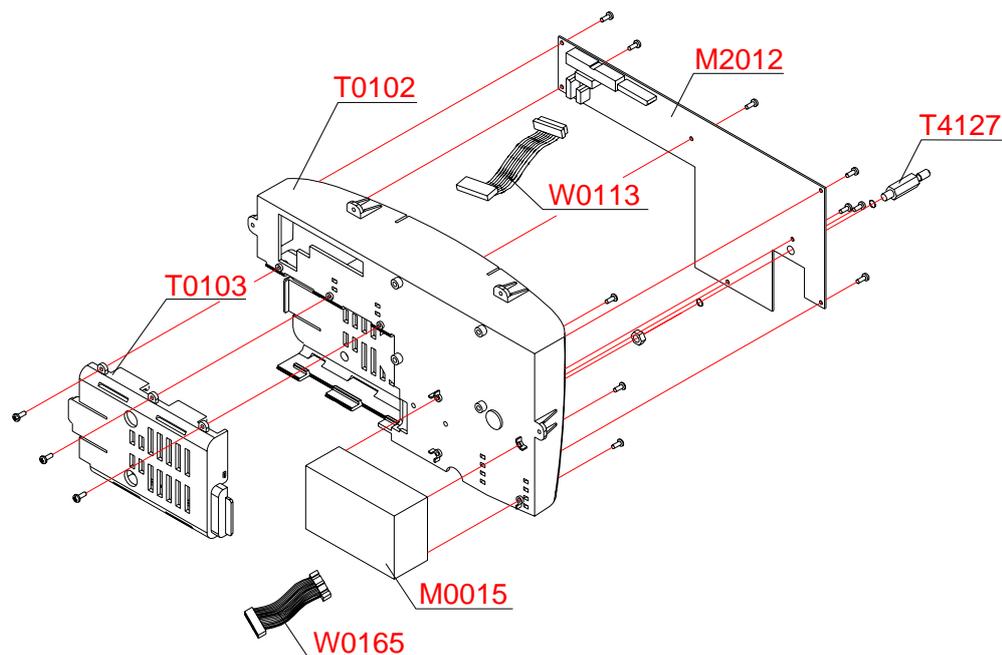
Rear case disassembly –SMPS case, SMPS and NIBP module
